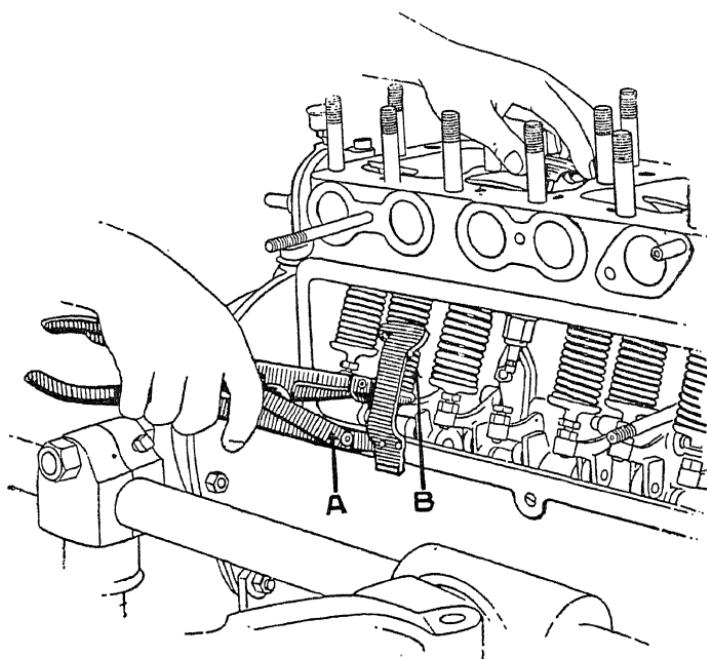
Installing Valve and Valve Spring (Studebaker Practice)
